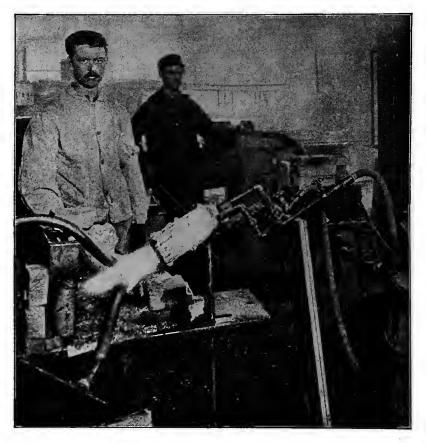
Portable furnace brazing the exhaust pipe of an automobile engine.
